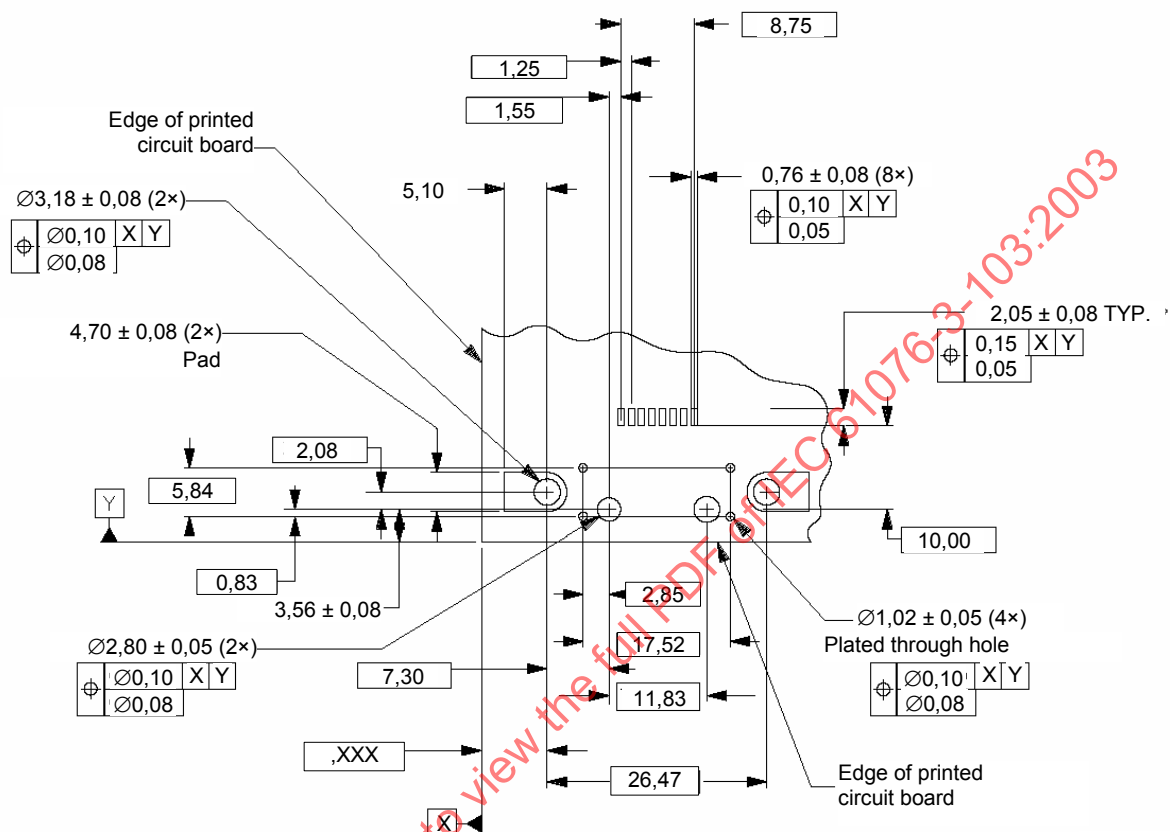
Fixed board connector (XB) straddle mount (version 2) (TB) printed board mounting pattern
